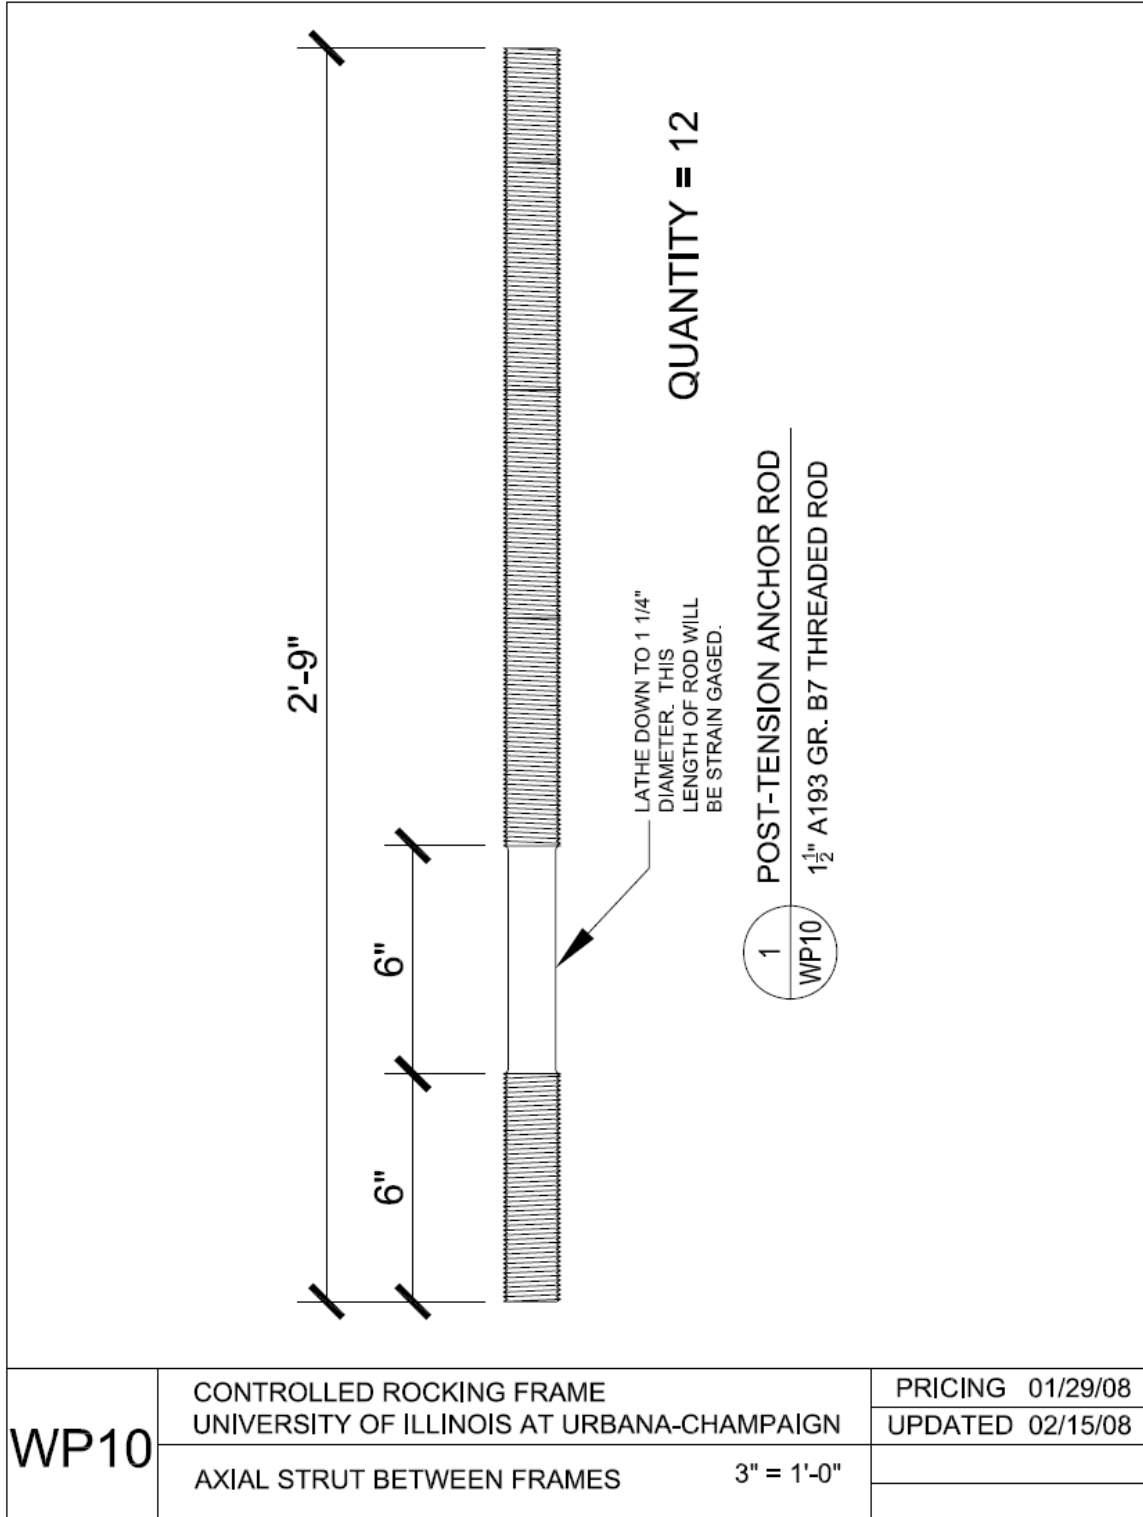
Work Plan Drawing – Anchor Rods for Post-Tensioning Anchorage Plate
